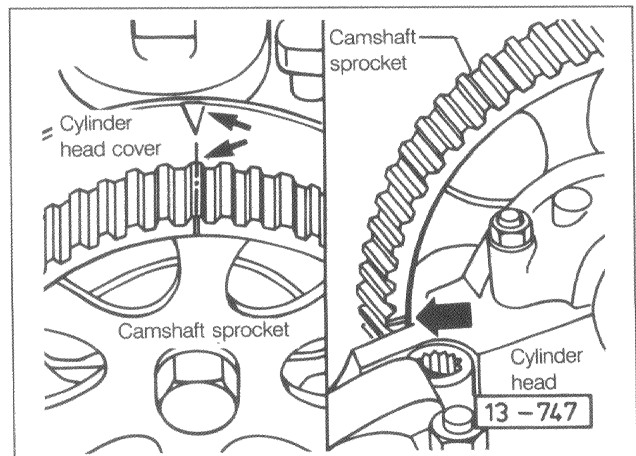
Camshaft timing marks on PL (16-valve) engine with cylinder head cover on (left) and off (right).
